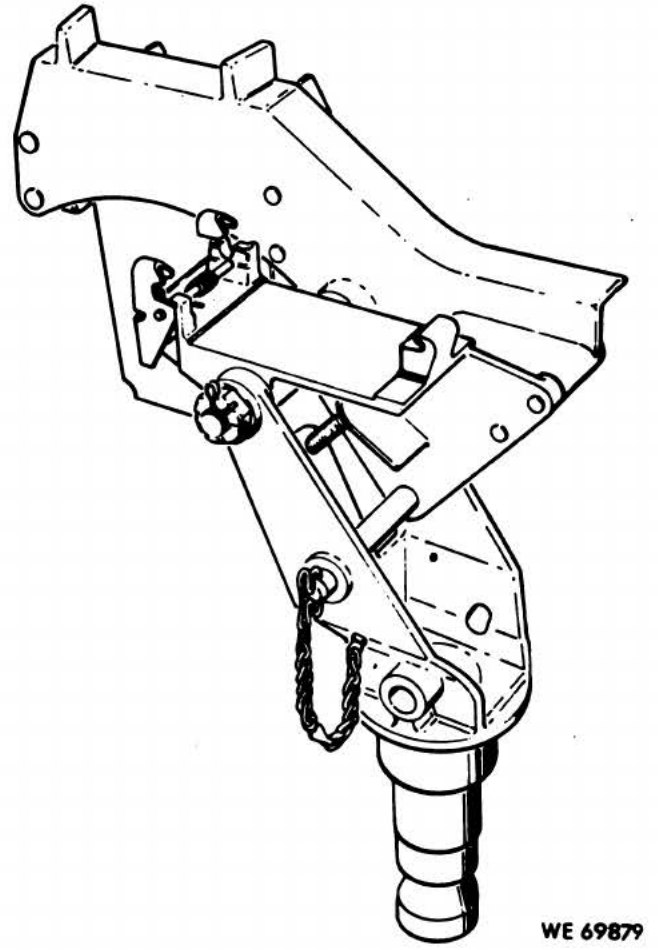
Mount, machine gun, M142—10900945—right front view.
